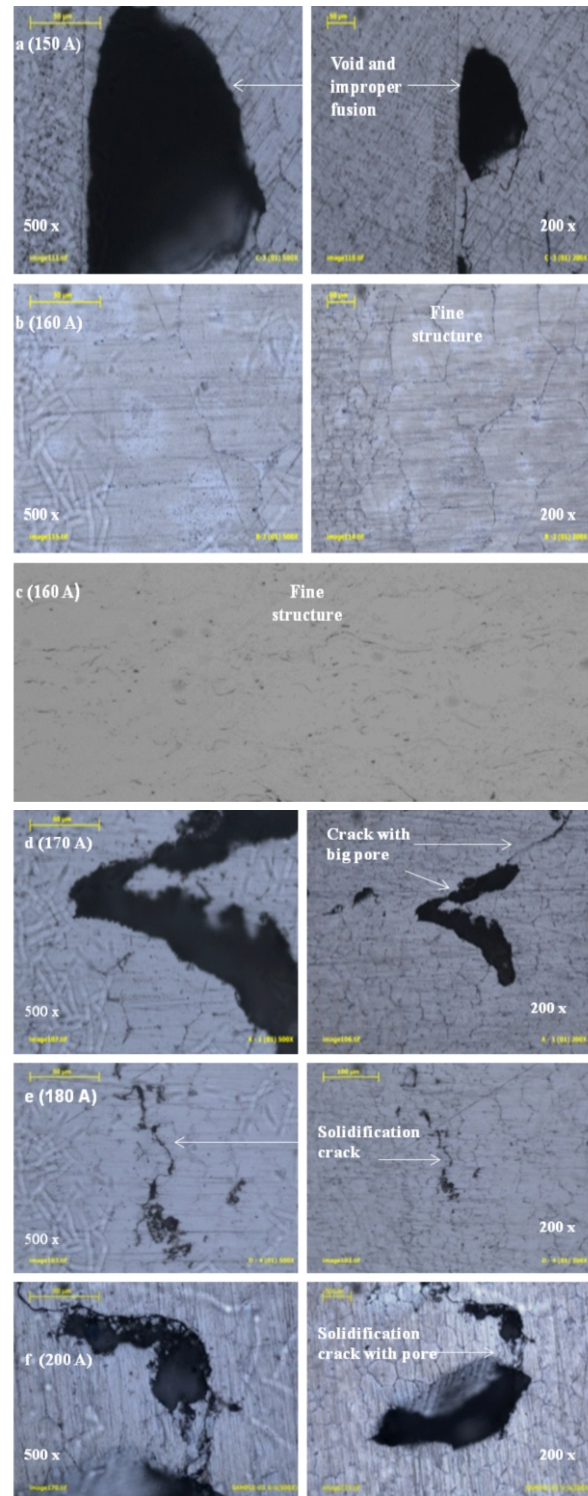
Manual TIG welding at (a) 150, (b&c) 160, (d) 170, (e) 180 and (f) 200 A
